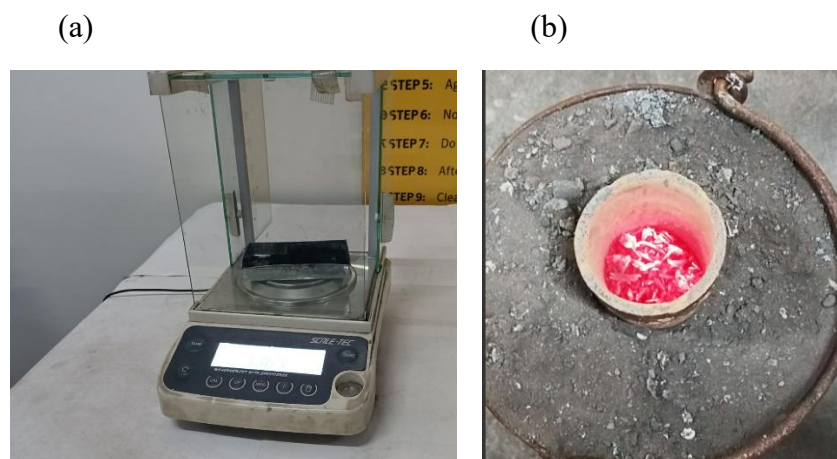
(a) Electronic weighing balance machine (b) Sand bucket
